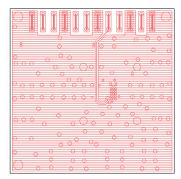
SKY66002-11 Evaluation Board Assembly Diagram
